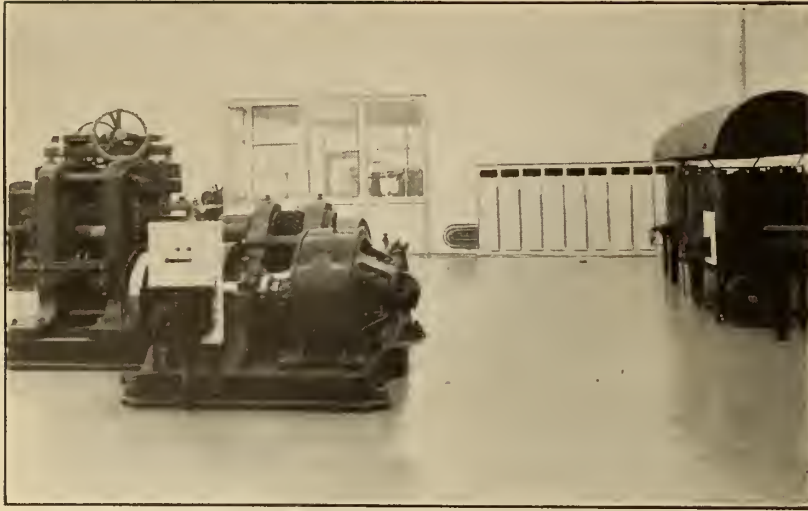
Breaking-down Mill and Fillet Annealing Furnaces.
